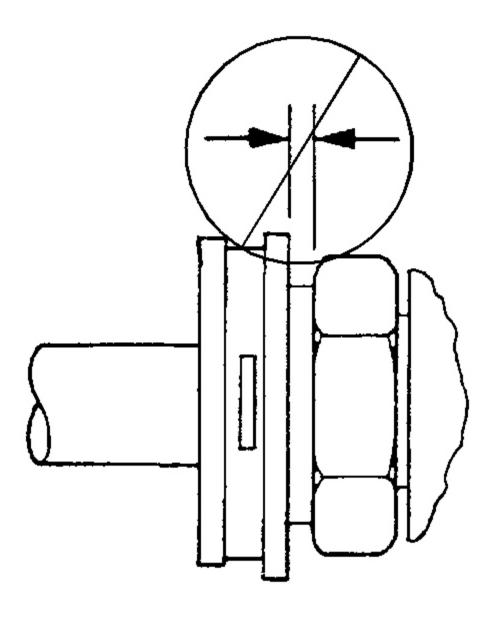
Ensuring That No Gap Is Present Between Cap & Fitting Courtesy of GENERAL MOTORS CORP.
